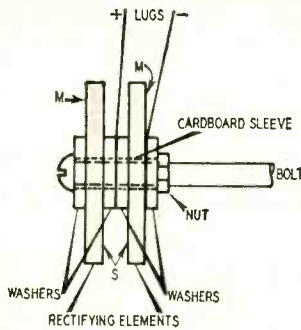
Assembling the rectifier: Left washer contacts head of screw. Nut also contacts screw. Therefore, negative lug and screw contacts both M surfaces. Cardboard sleeve over screw insulates positive lug and S-surfaces.
